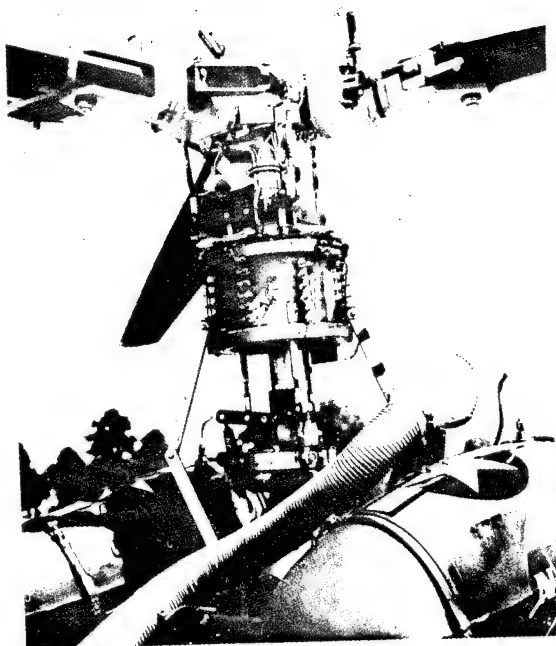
H-13G hingeless rotor hub and slipring assembly.
